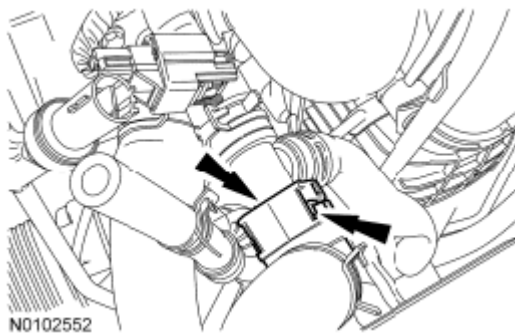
Locating Coolant Degas Bottle Hose And Retaining Clip
